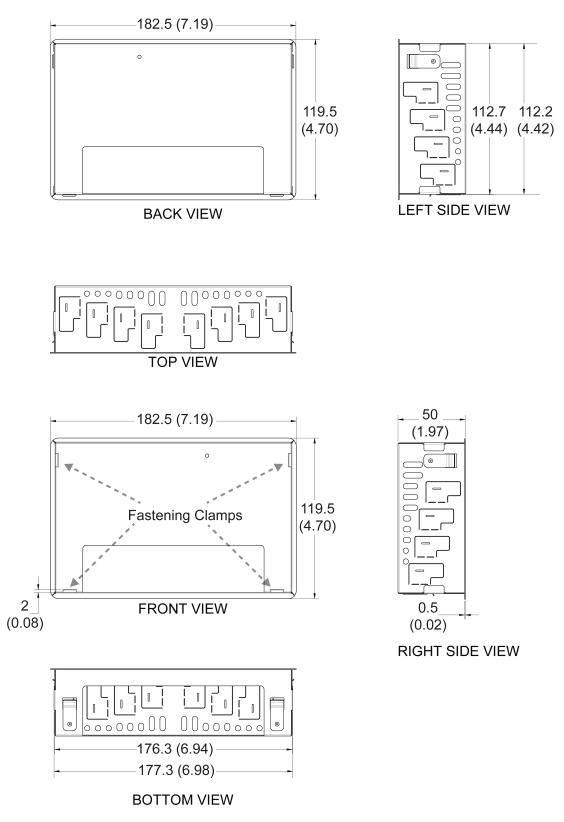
HORYZON-C7 Wall Mounting Kit dimensions
